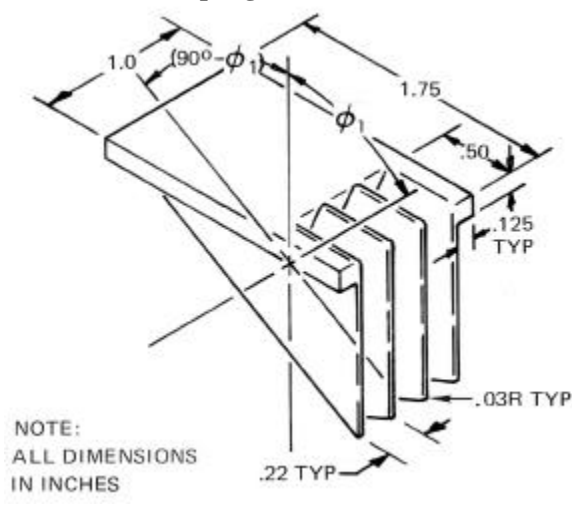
Angle Beam Wedge Requiring a Coupling Fixture.
